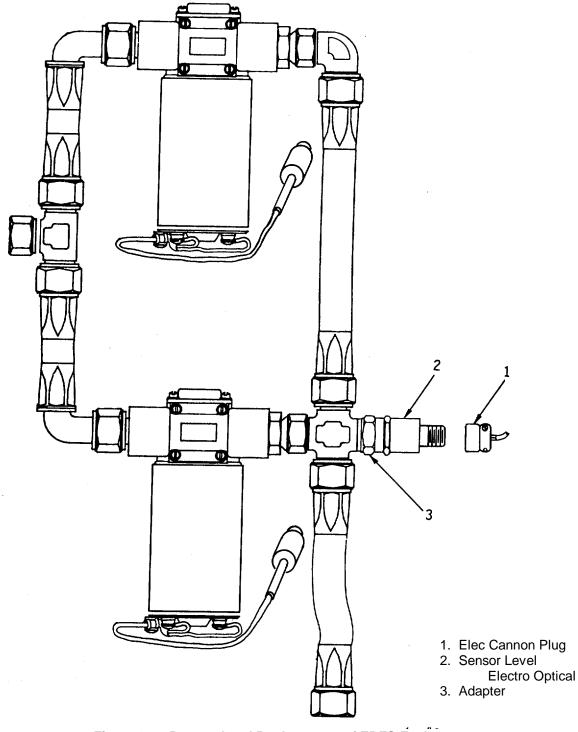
Removal and Replacement of ERFS Fuel Sensor Level Electro Optical
